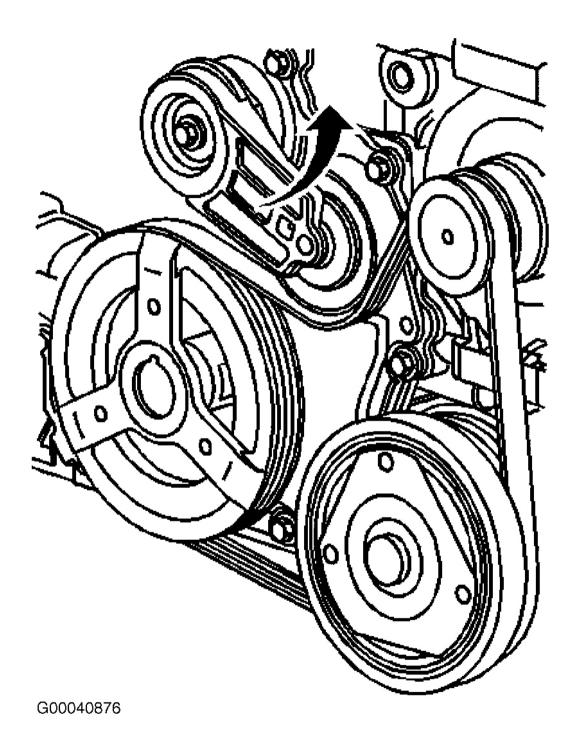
Serpentine Belt Routing (4-Cylinder) Courtesy of GENERAL MOTORS CORP.
